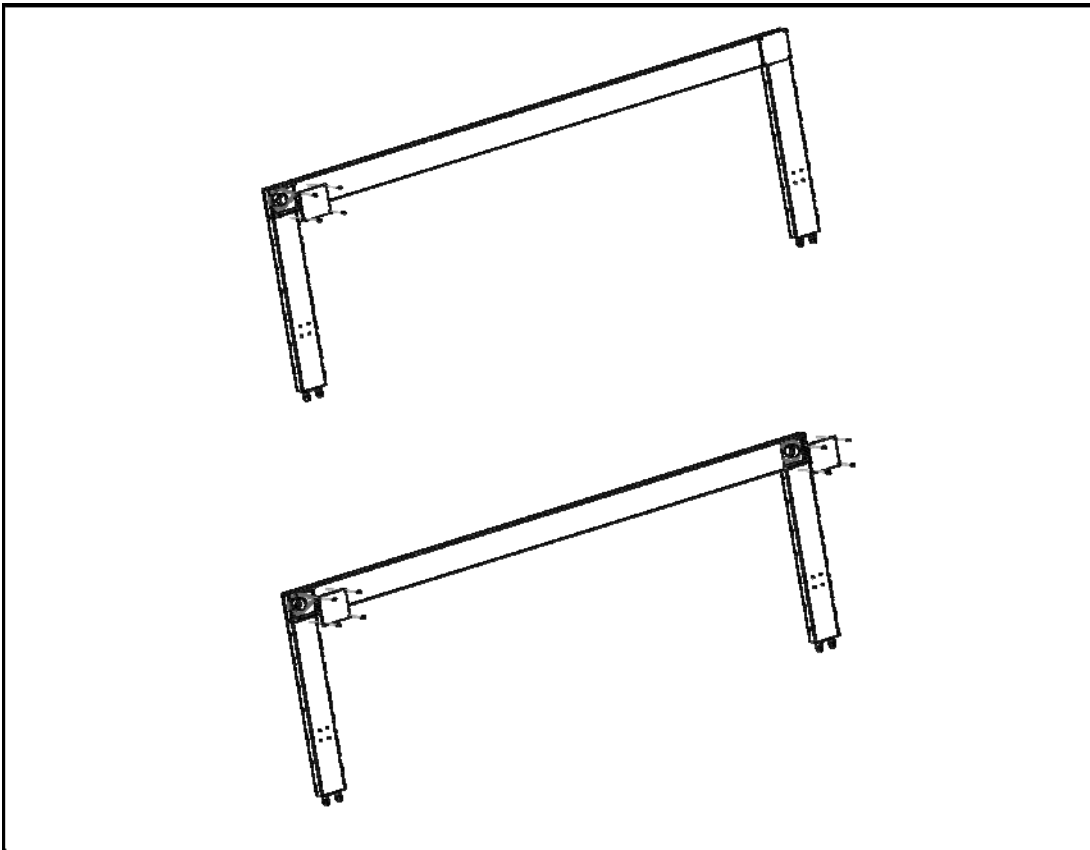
Barrier Gate Cable Access Panel Removal, Maintenance Only
